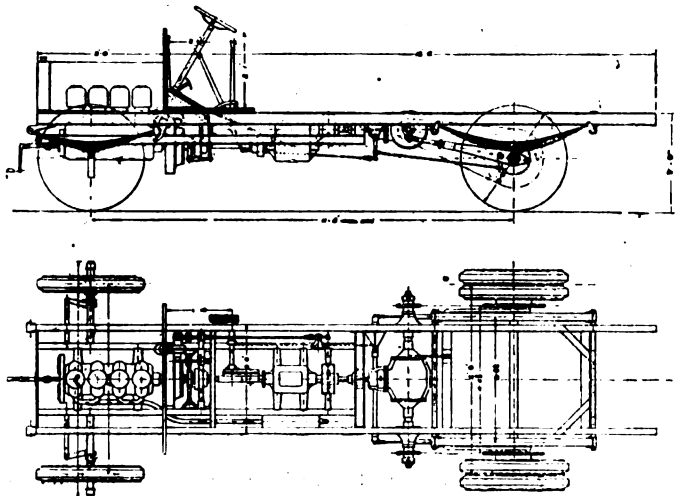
Elevation and Plan of Churchill Char-a-banc.
